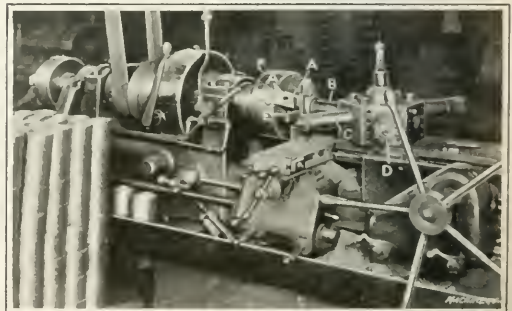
Bardons & Oliver No. 7 Turret Lathe equipped with Hannifan Three-jaw Air Chuck and Tools for facing Open End of Pistons and boring and reaming Hole at End
